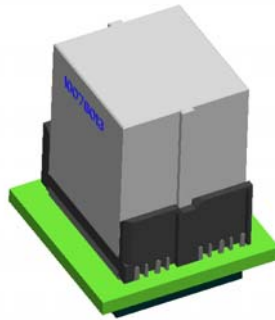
PCB footprint with screen printed connector outline (standard backpanel header shown)
